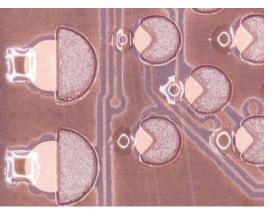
Picture of solder paste and SJEM S onto pads of PCB
